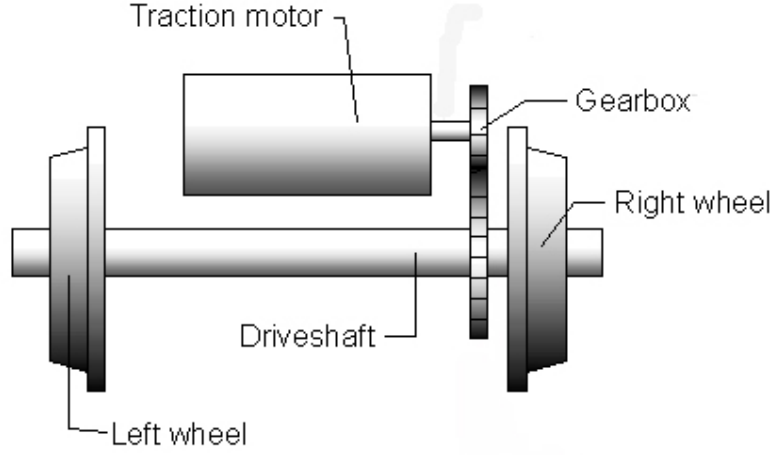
The principle appearance of the modelled mechanical transmission, including traction motor, gearbox, shafts and wheels.
